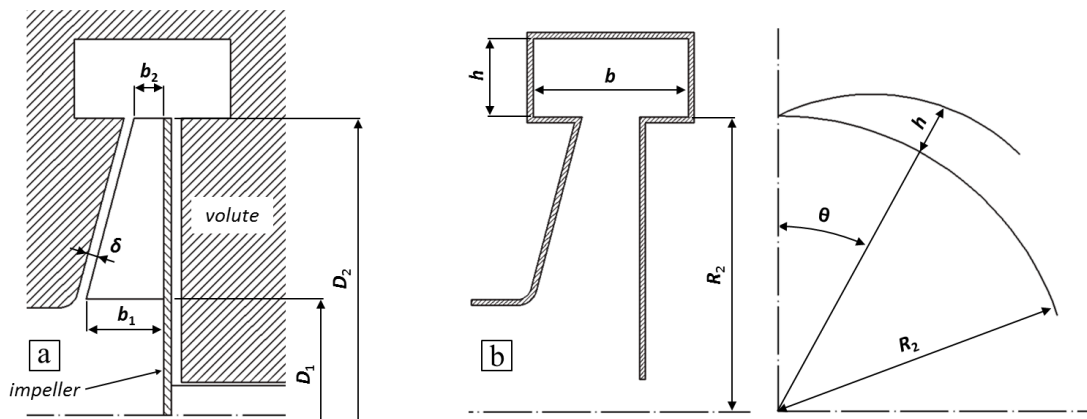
fan one-dimensional design: a) impeller geometry and b) volute geometry
